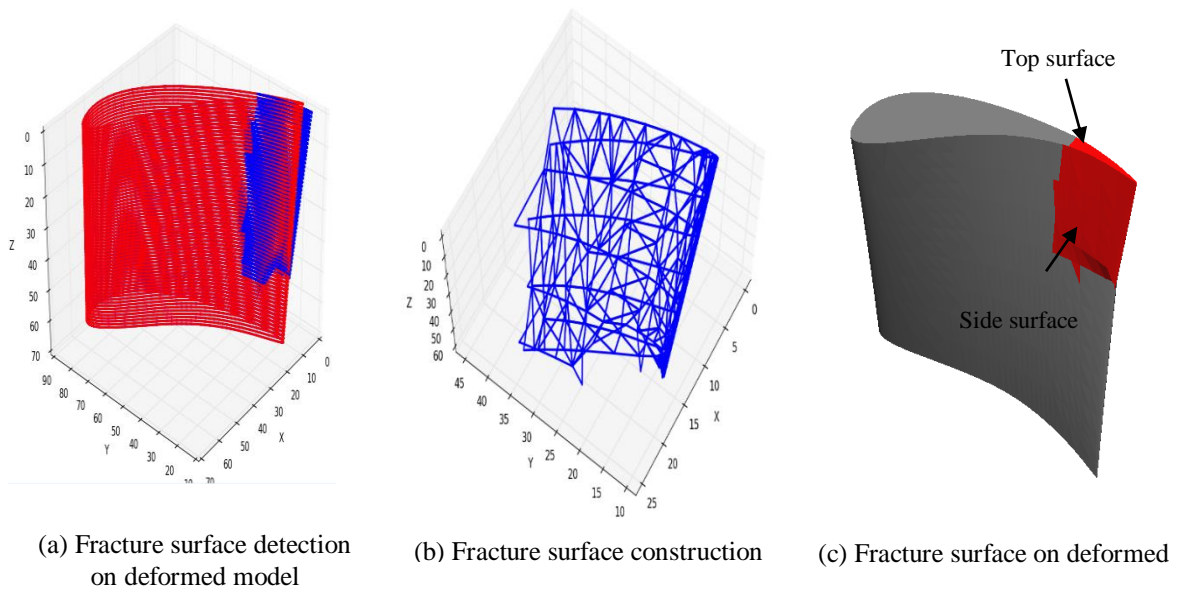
Fracture surface construction on deformed blade model
